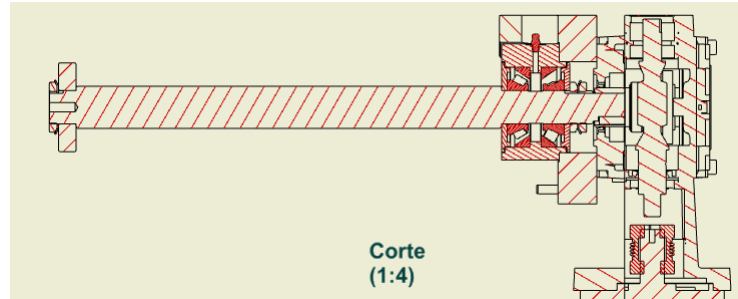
Engineering drawing of the assembly of the ball screw in the H axis of e-MOB 52
